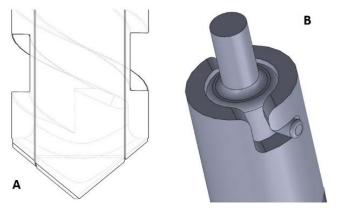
A) Inner/Outer Drill details B) Inner drill pins to drive outer drill
